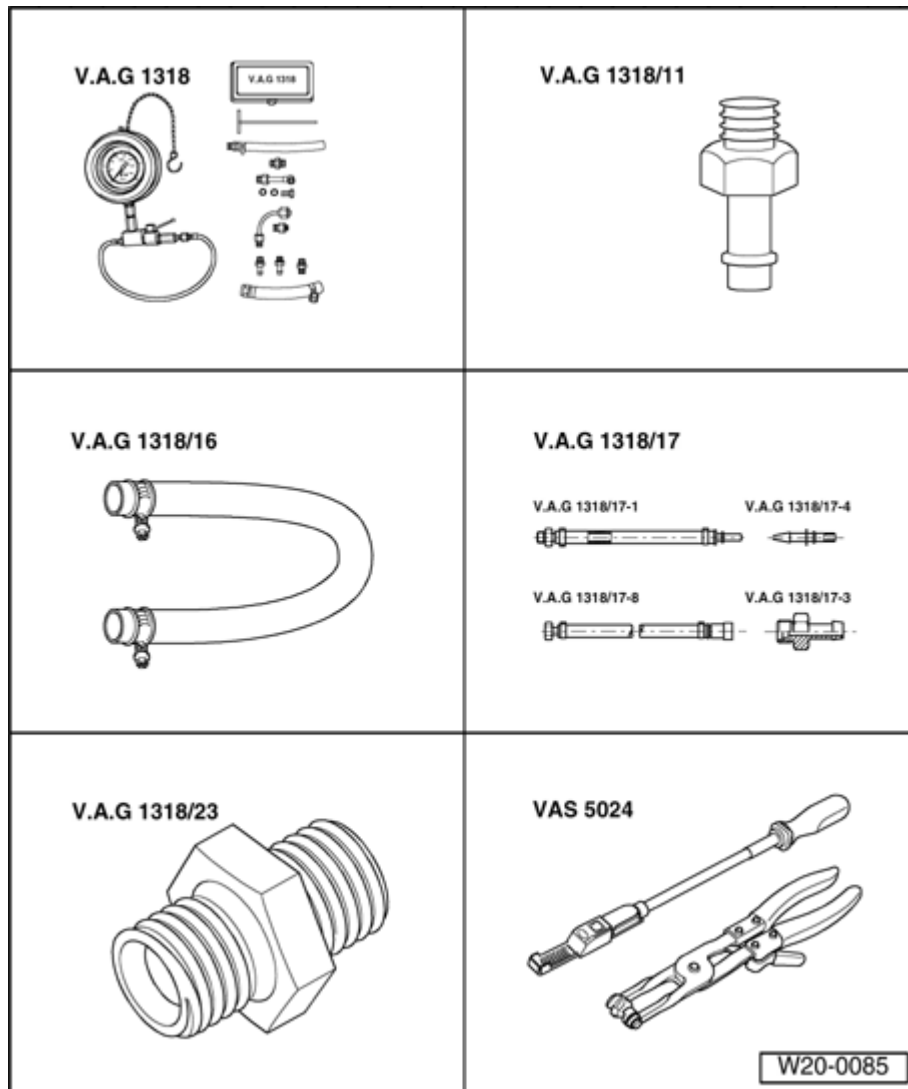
Identifying Special Tools - Fuel Pumps, Checking (1 Of 2)
